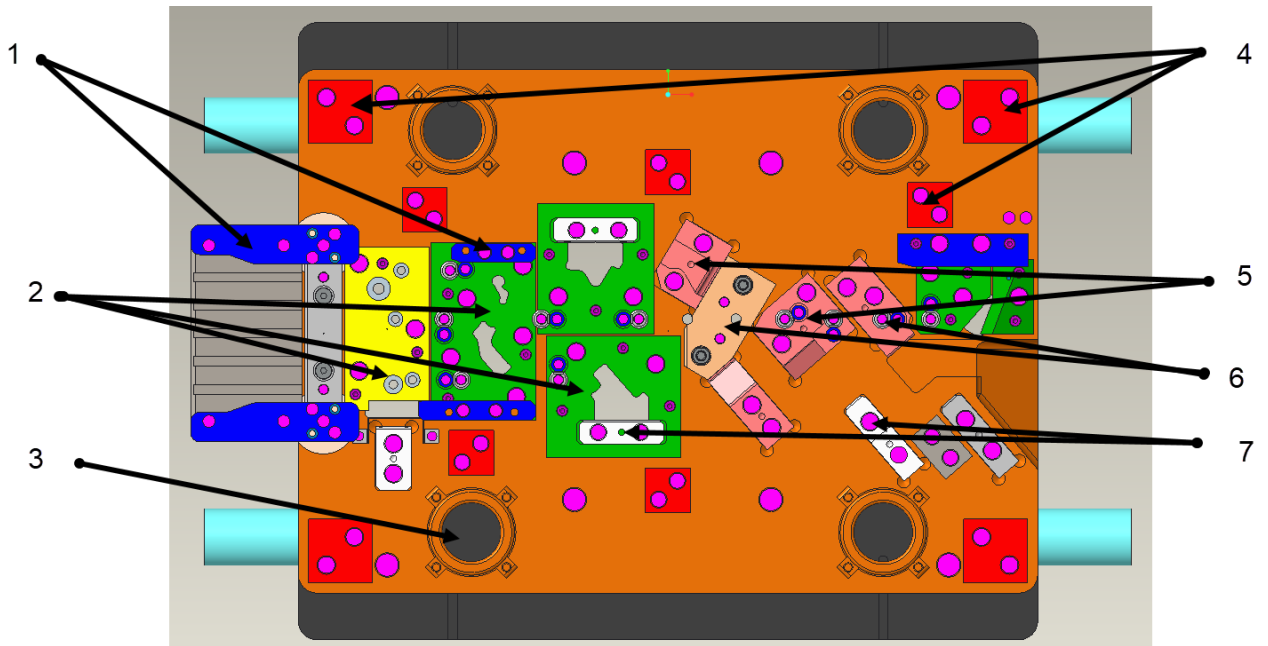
Main component groups of progressive die's bottom plate. 1 – guiding rails (blue); 2 – cutting dies (yellow, green); 3 – guide bushing; 4 stop-blocks (red); 5 – forming dies (pink); 6- lifters (pale pink); 7 – punch supports (white)
